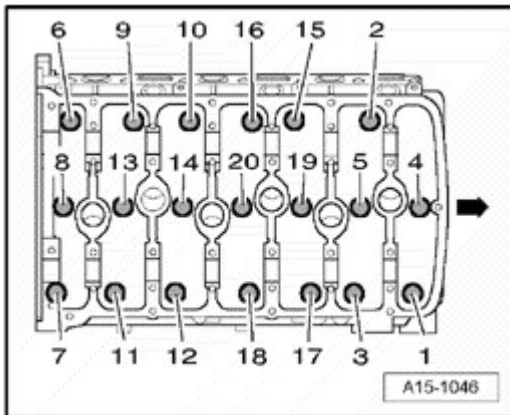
Cylinder Head Bolts Loosing Sequence - Cylinder Bank 1 (Right)
